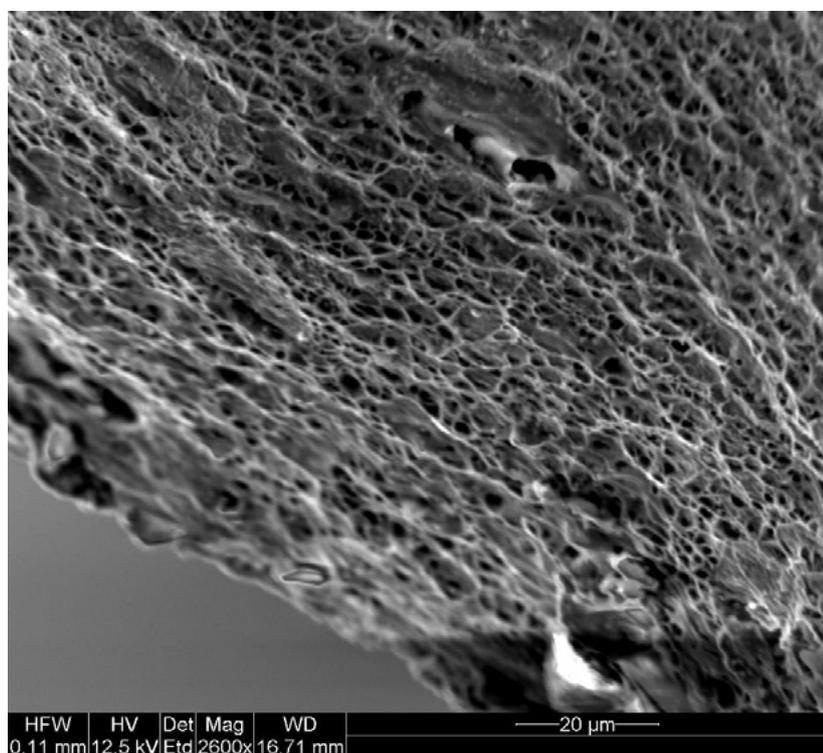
External bellow plate width section: dimple morphology indicative of ductile fracture
